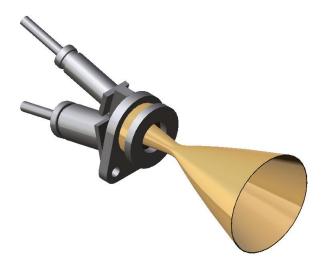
200N Thruster Assembly (Nozzle Cone & Backing)
